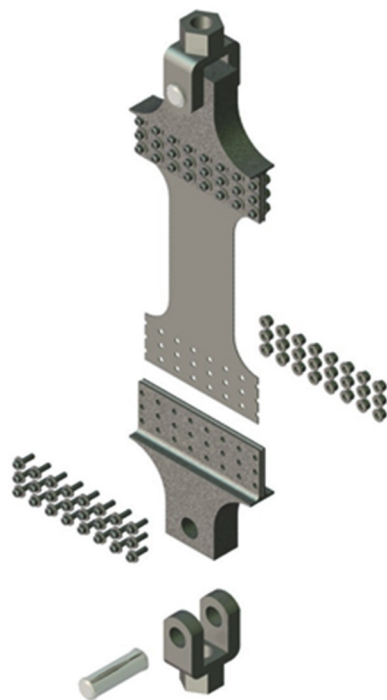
Grip adapter with 24 bolt pattern and clevis mount pin to limit slip and allow for sample rotation
